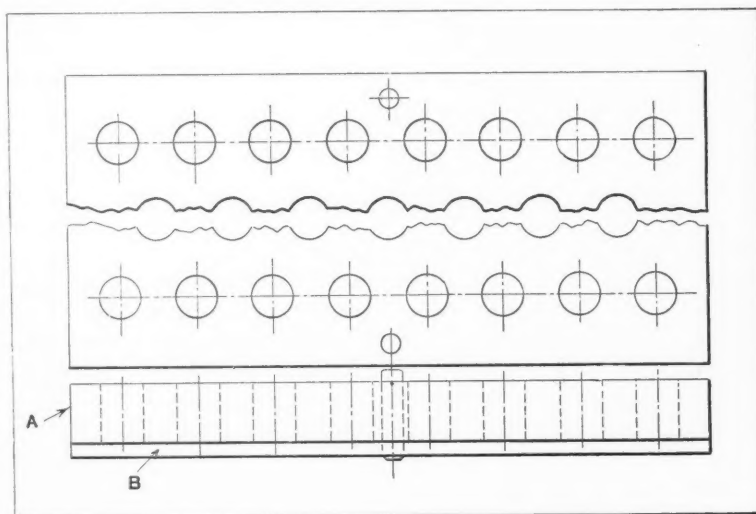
Assembling Plates, Showing Honeycombed Construction
